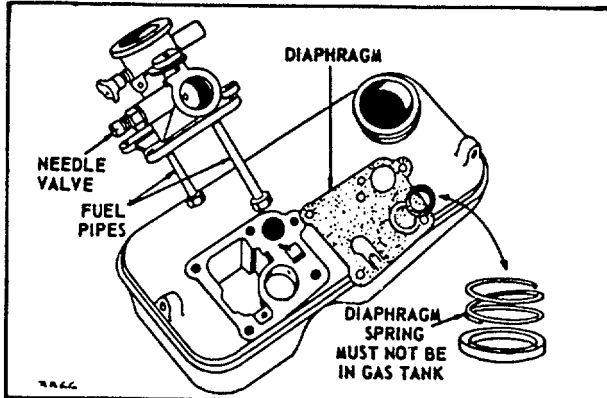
Exploded View - Carburetor and Tank Assembly
